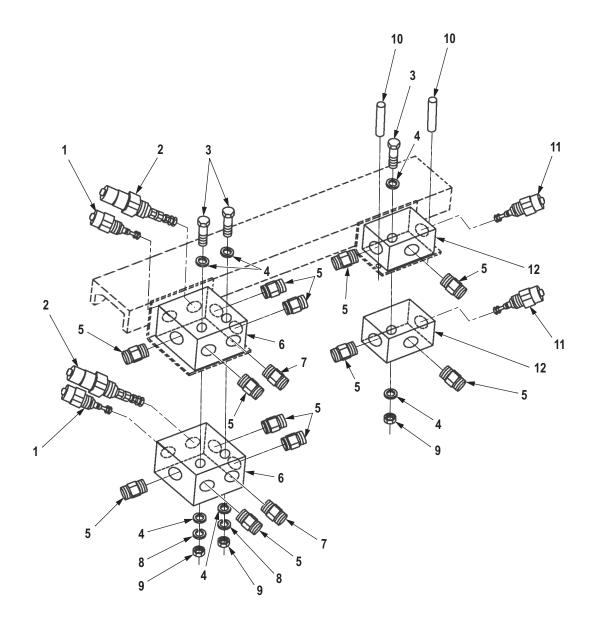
Apron Dozer and Blade Assembly. (Sheet 2 of 2)
